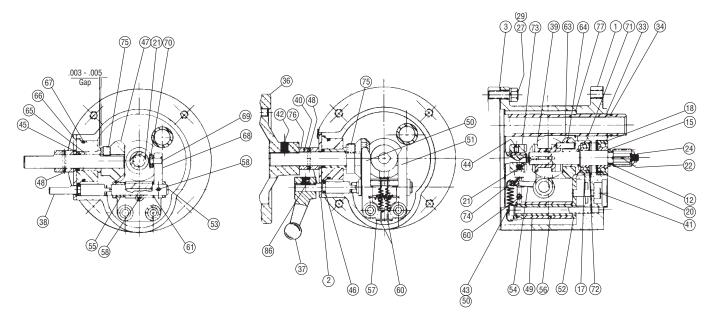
Manual Handwheel Clutch Assembly Parts Drawing
